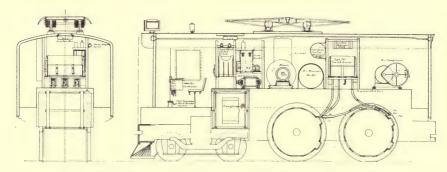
Pennsylvania Railroad. Experimental Locomotive, 1909. Two single-phase 460-h. p., gearless, quill-mounted motors. Atlantic type locomotive, No. 10,003.
